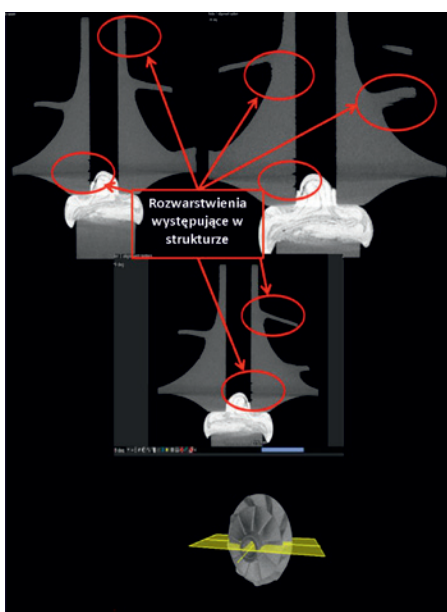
Flaw detection in X-Z cross-section for compressor rotor made of ABS
